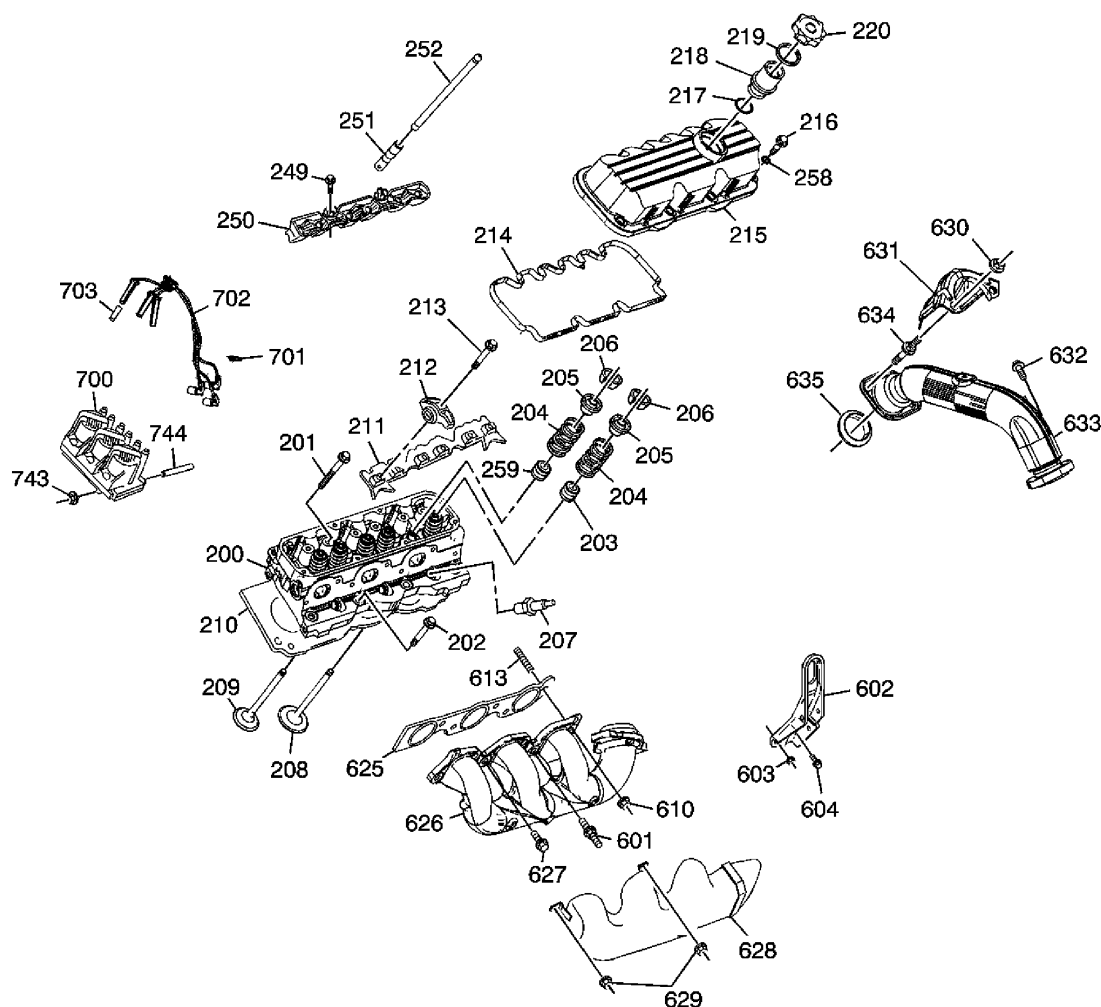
Cylinder Head & Components Disassembled View - Left - L36
